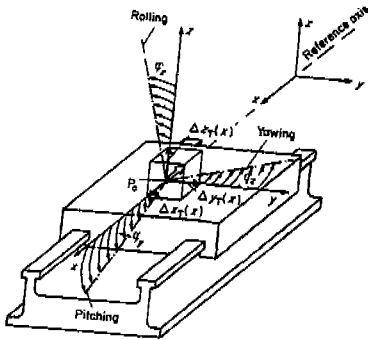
Three translatory and three rotary deflection of a machine component
